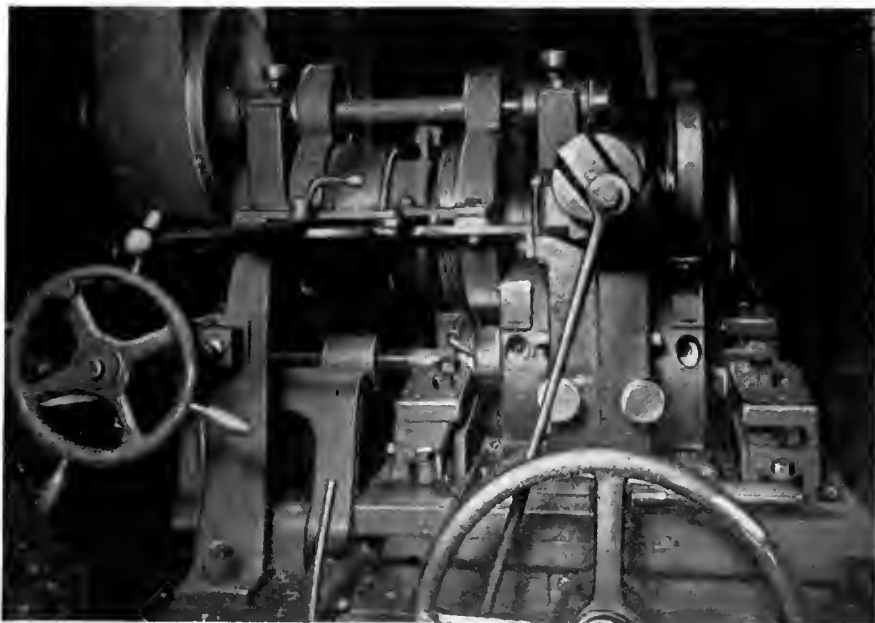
FOUR-TOOL CUTTING-OFF MACHINE OPERATING ON BOTH ENDS OF SHELL SIMULTANEOUSLY.
